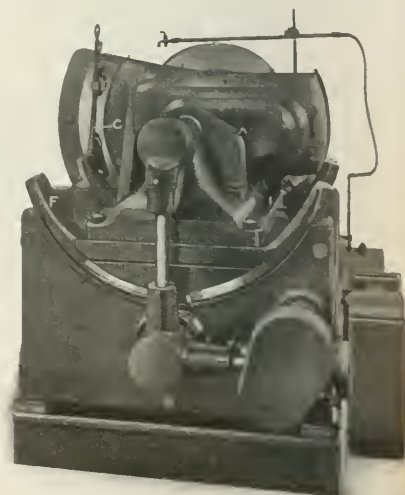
View of Machine from End on which Tool-cradle is mounted
